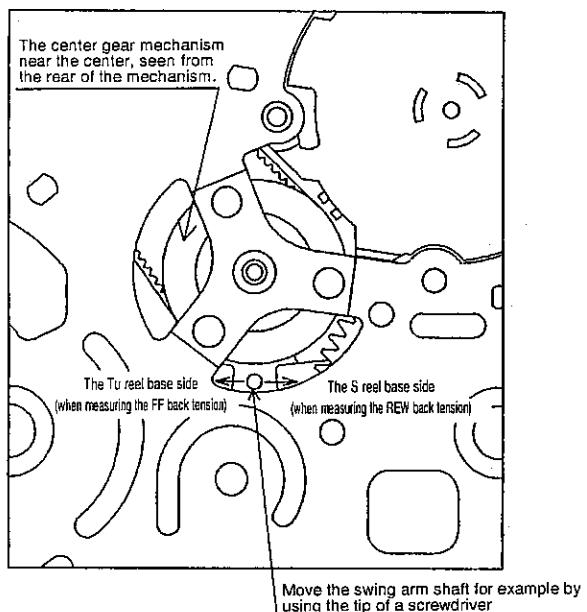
The swing arm shaft position (seen from the rear of the mechanism) when measuring the FF • REW back tension.
